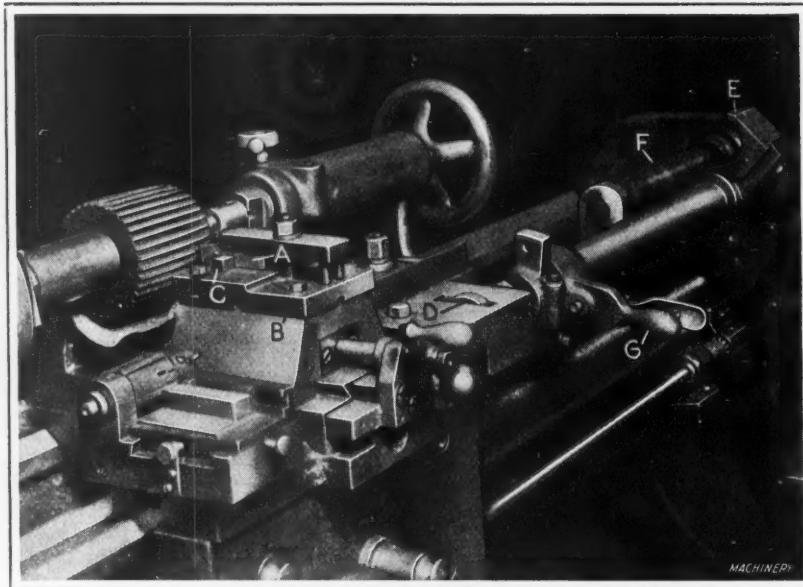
Milling the Threads in the End of Chaser Blanks, using Special Machine and Tapered Milling Cutter
